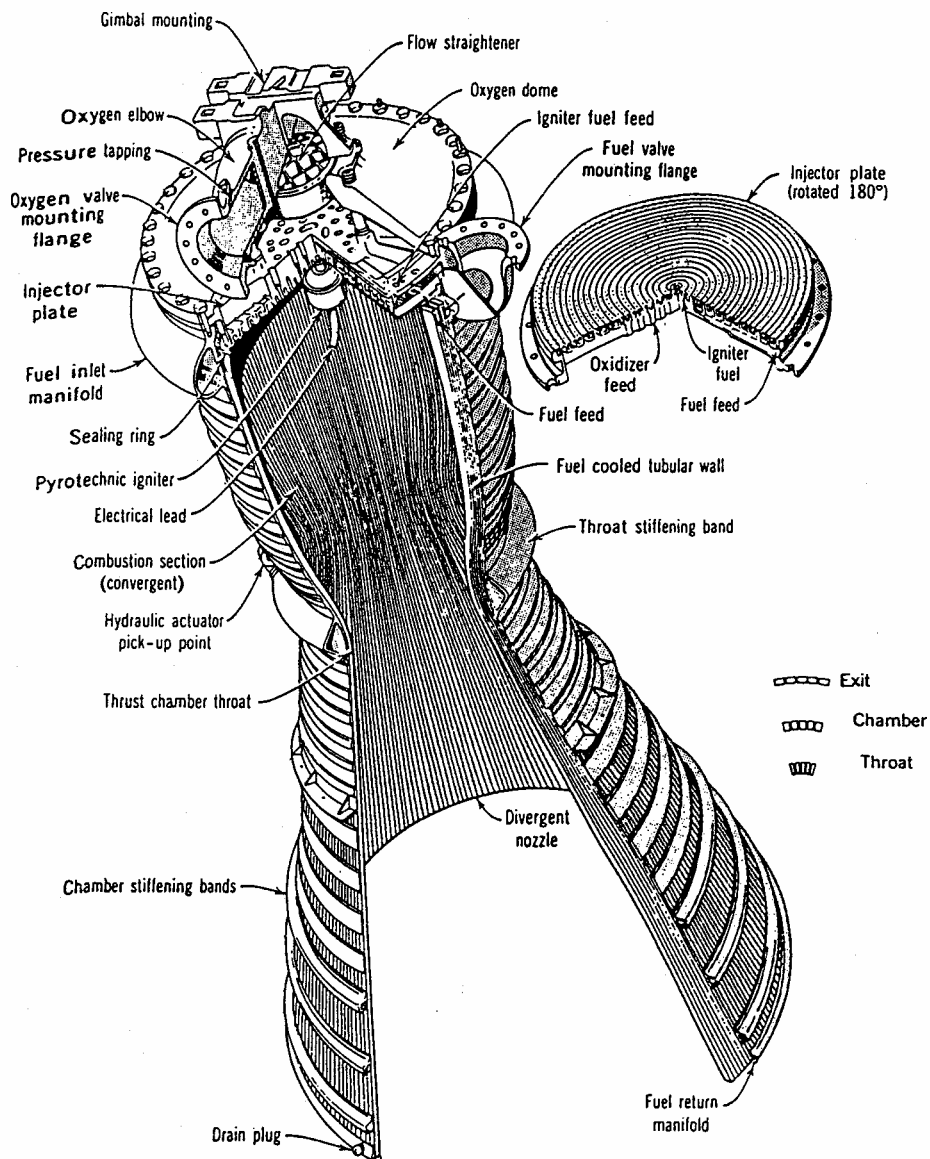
Early version of large TC at 120,000-lb thrust with tubes, which are formed, shaped, and then brazed together (from Ref. 2).
